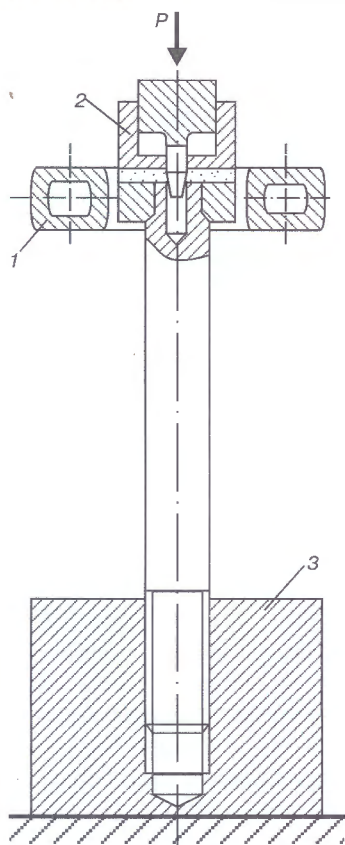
Schematic of assembly of a sample for heating: 1 — inductor; 2 — pressing-in device; 3 — support
